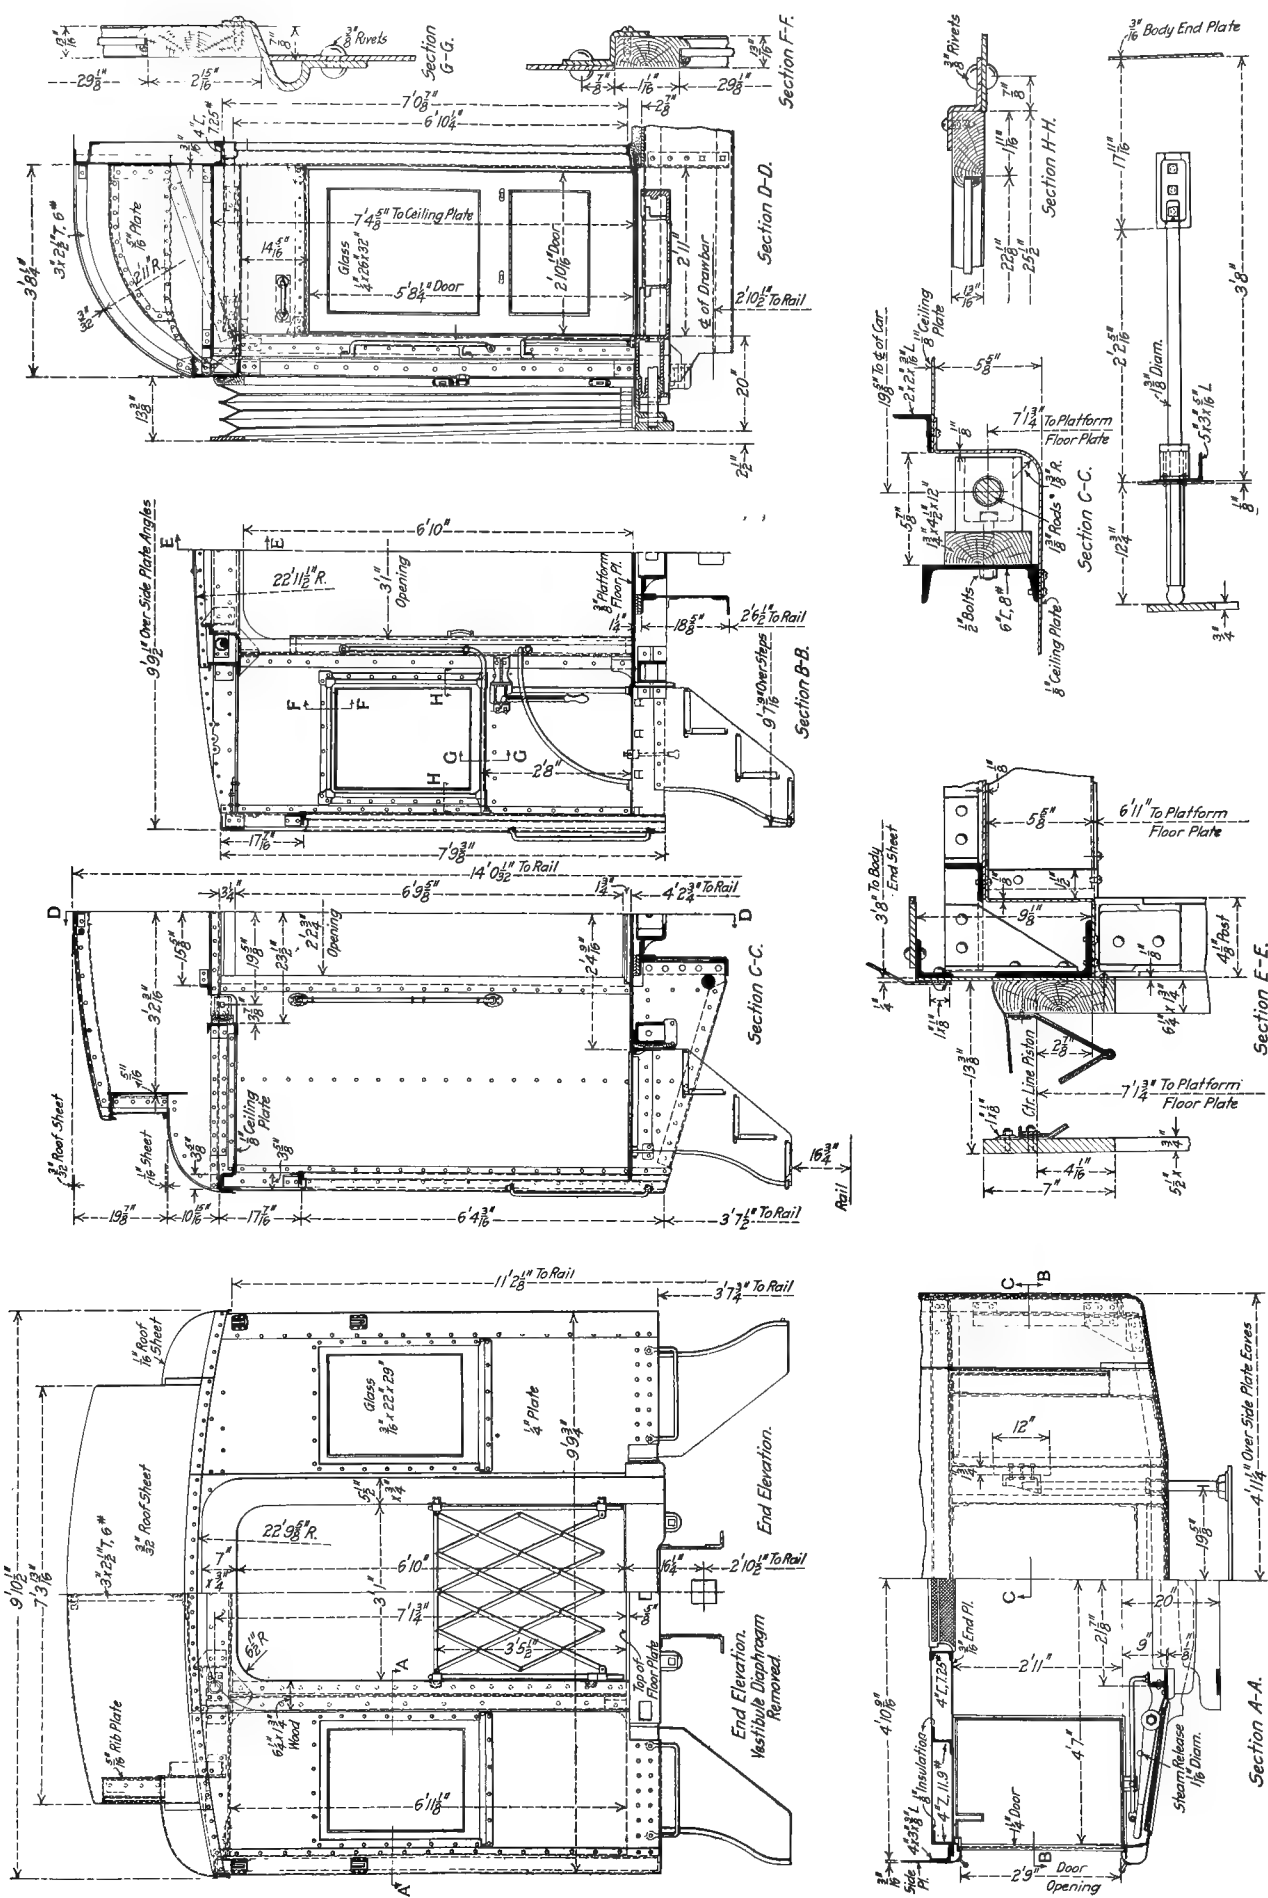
End Arrangement of Central Railroad of New Jersey Steel Day Coach Shown in Figs. 144, 381 and 382.
